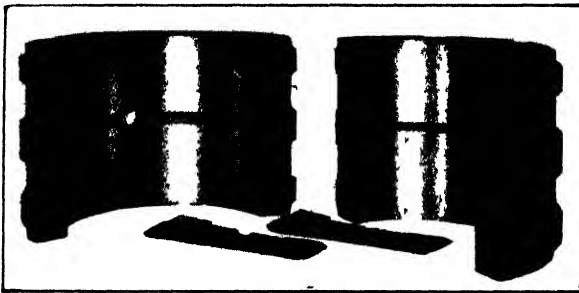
Main bearing of the Fairbanks, Morse Diesel.
